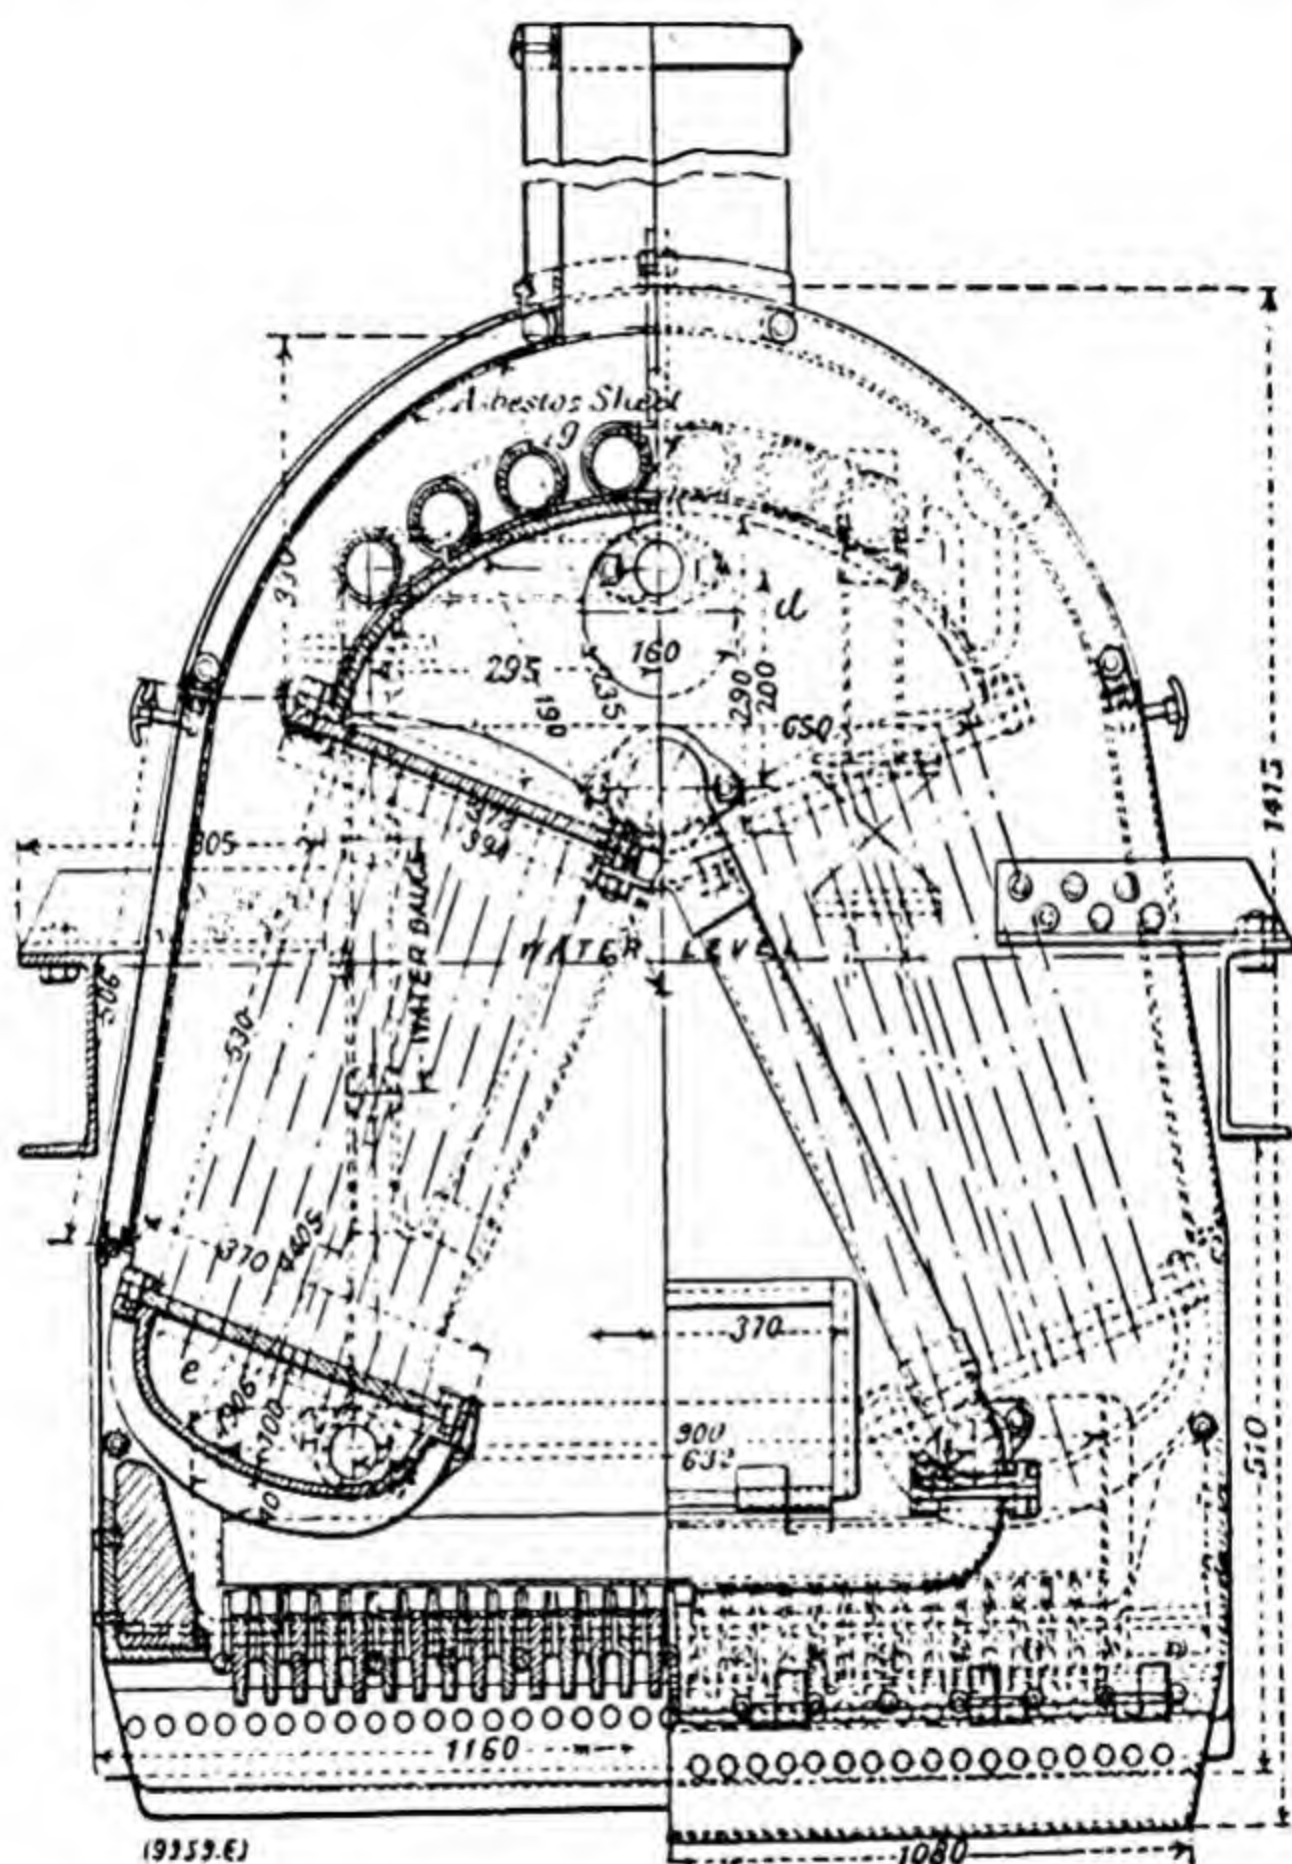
Sectional front elevation of the water-tube boiler for Barber's steam wagon.
